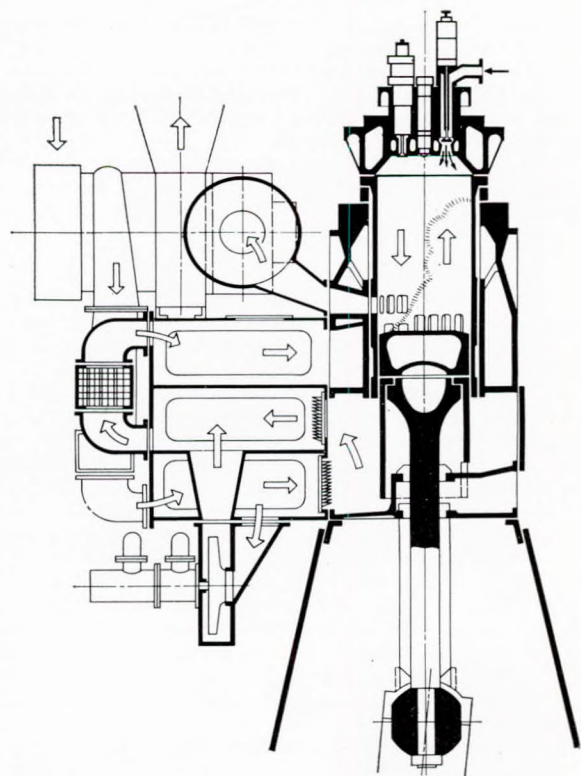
Part-cross-section of a RNMD Diesel gas engine
